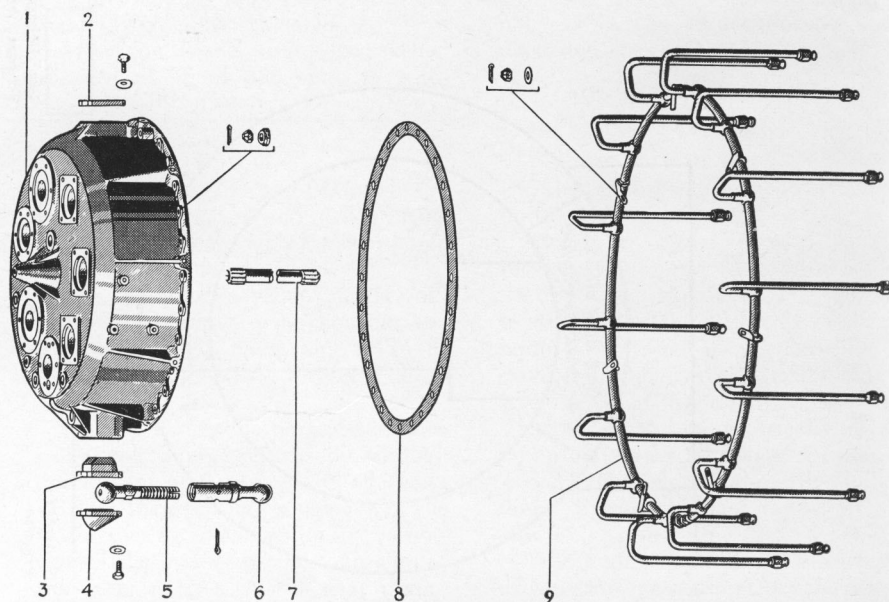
Forward section of the basic assembly: (1) accessory drive gear casing; (2) support pad plate; (3) ball seat; (4) ball cap; (5) male support; (6) female support; (7) coupling shaft; (8) bearing support gasket; (9) fuel manifold assembly.
